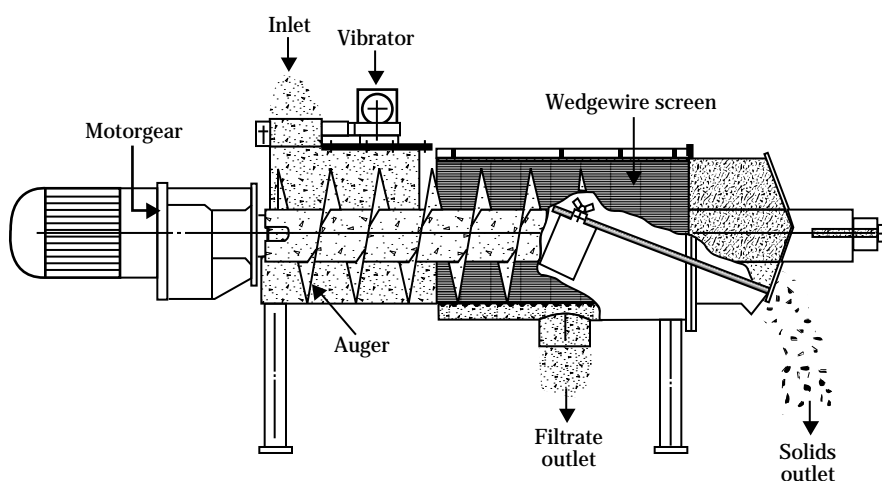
Screw-press type, cylinder separator (courtesy of Fan Engineering USA, Inc.)
